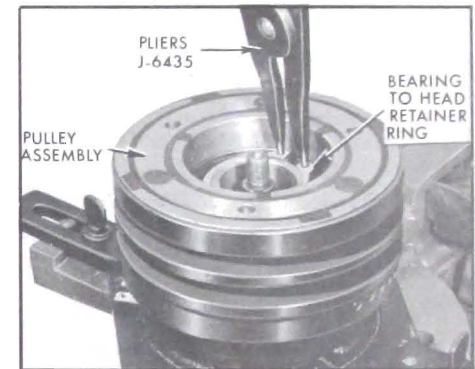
Removing or Installing Bearing to Head Retainer Ring
